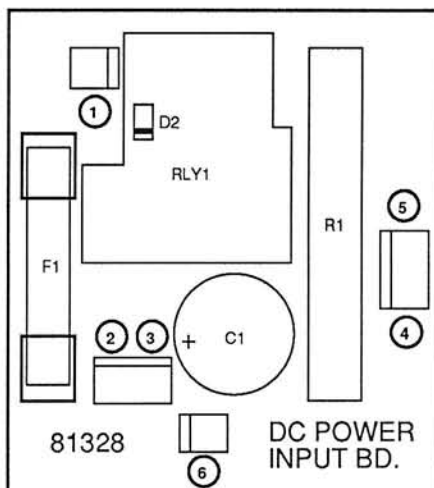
81328 DC POWER BOARD COMPONENT LAYOUT
